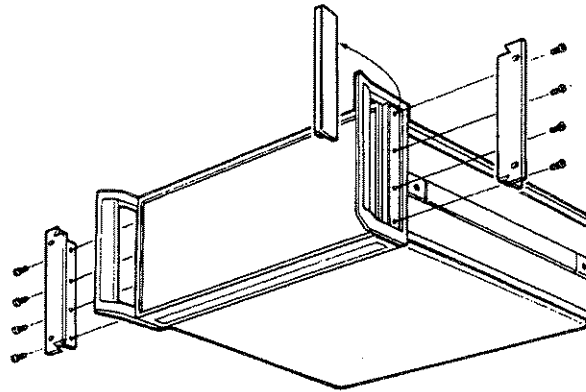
Attaching Flanges to Instruments With and Without Handles
